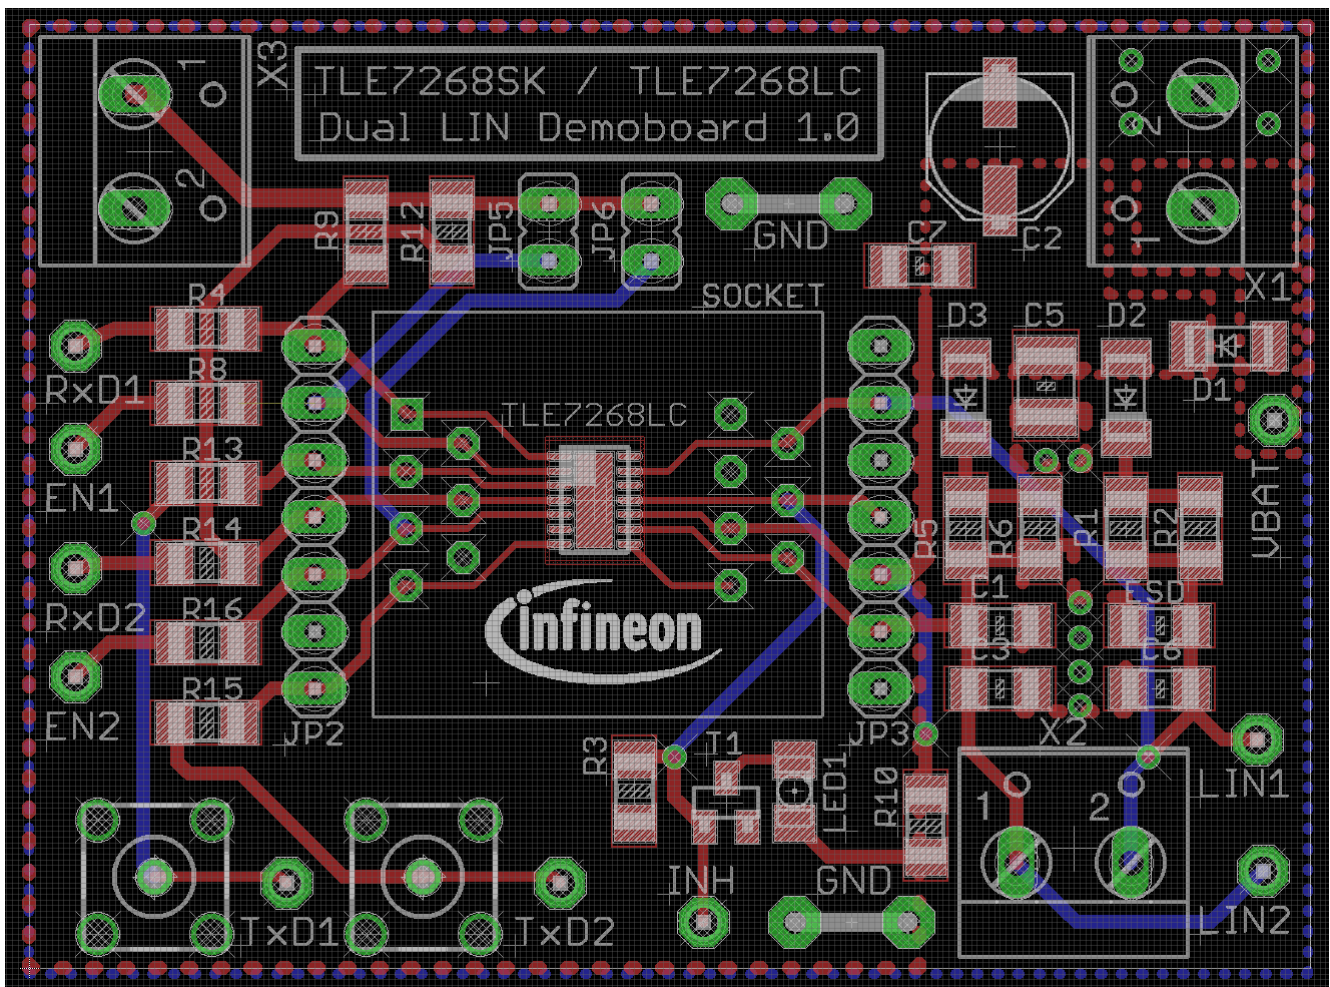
PCB layout of TLE7268 Dual LIN demoboard (Top + Bottom)
